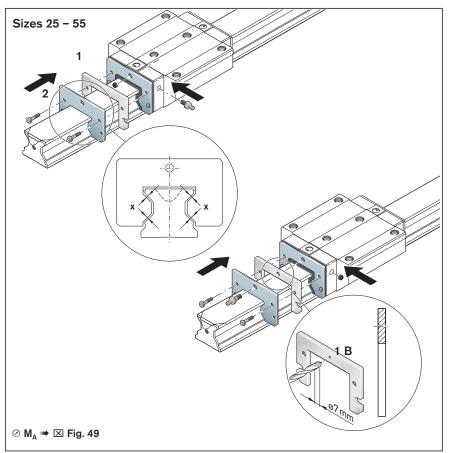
Mounting the FKM seal kit with metal scraper, sizes 25-55
